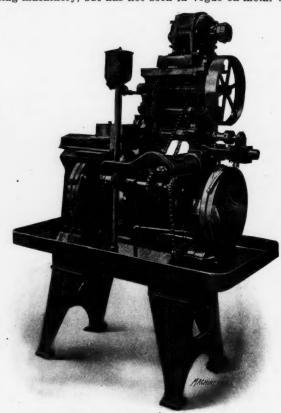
Rear View of Wells Automatic Screw Machine, showing Driving Mechanism
